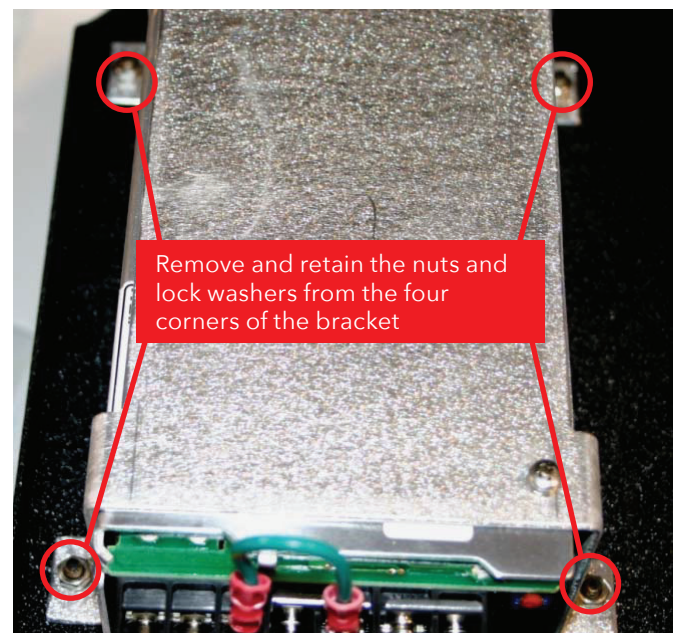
THE AC POWER SUPPLY MODULE MOUNTING BRACKET.
